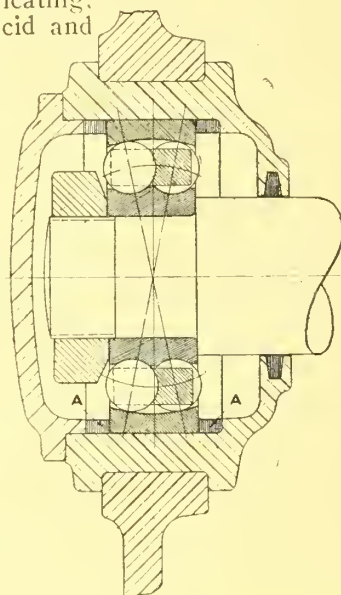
MOUNTING OF RADIAL BEARINGS FOR HORIZONTAL SHAFT.
